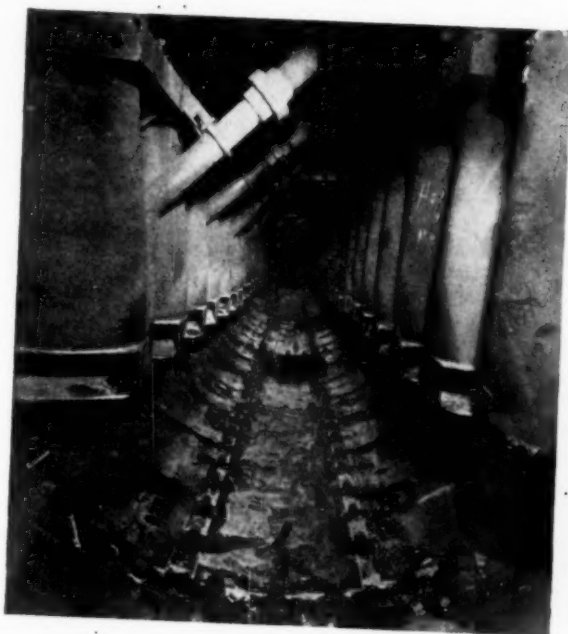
UPPER DRUM OF NO. 7 BOILER
